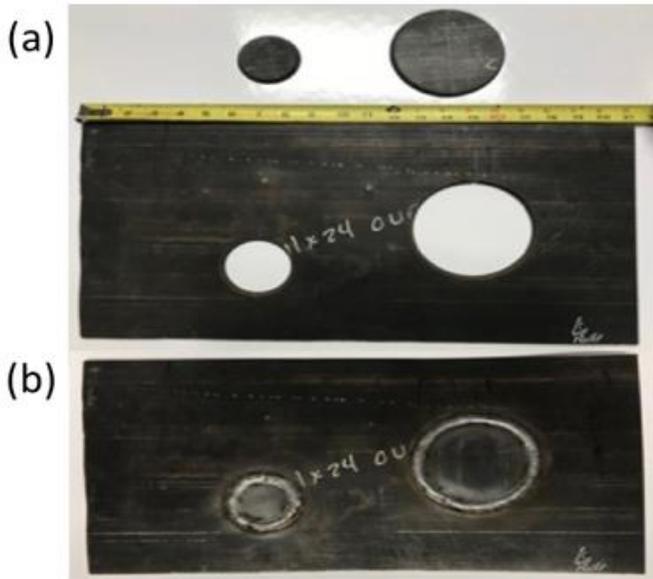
Flash® 600 welded “circles” which have been cut out (a), rotated, welded (b) without cracking
